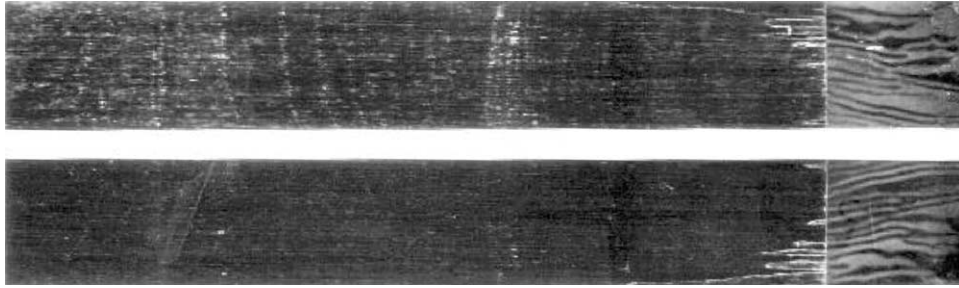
Fracture surfaces of sample tested at -50°C .
